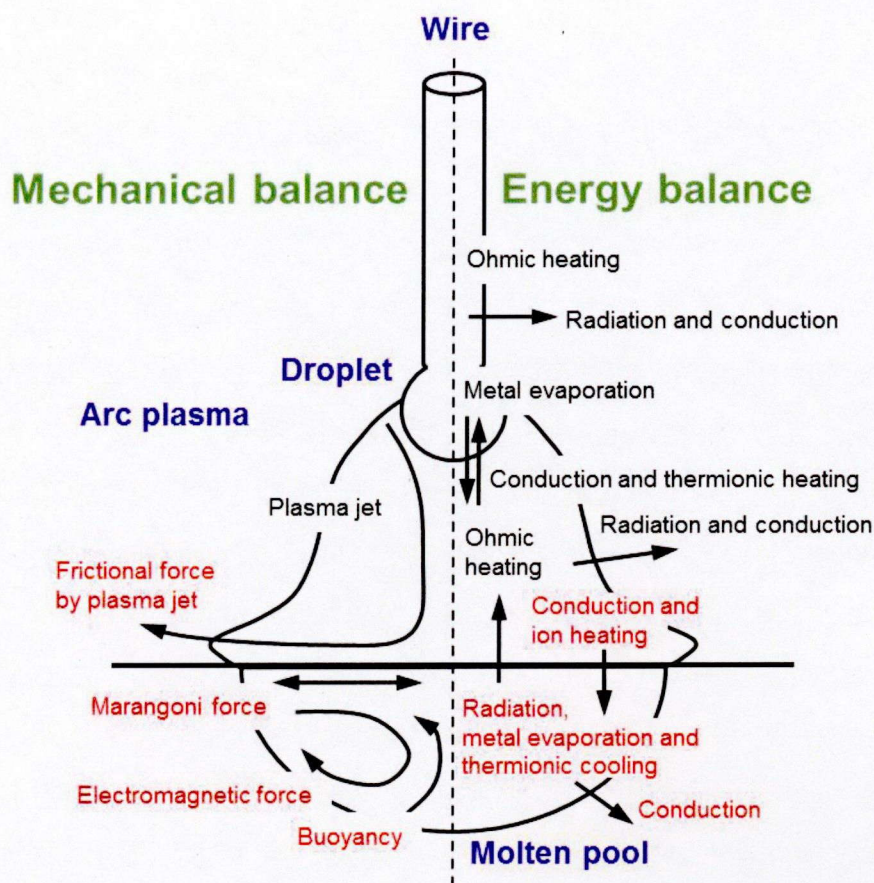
Schematic illustration of mechanical balance and energy balance in GMA welding process.
